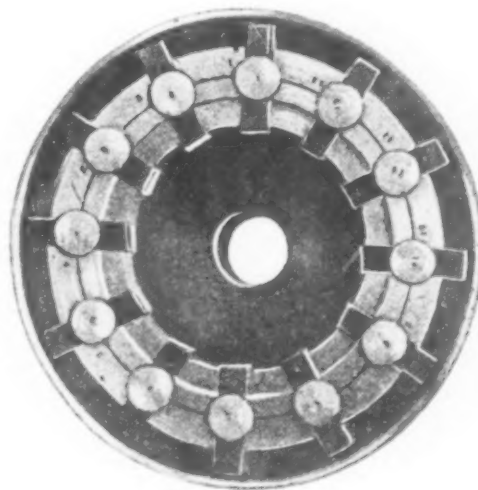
CYCLOID THREAD-MILLING CUTTER
